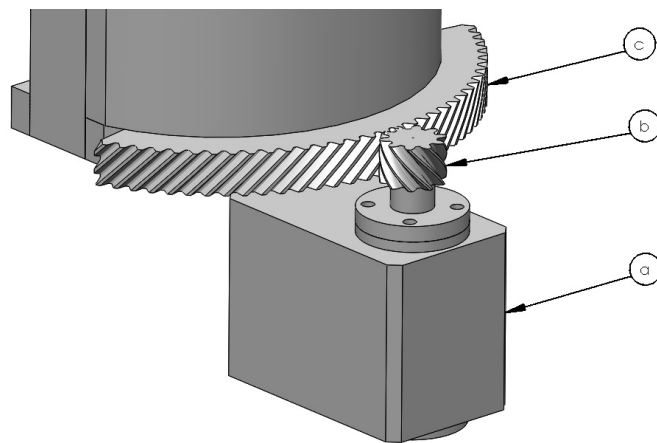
(a) Servo motor for  $\phi$  angle (b) pinion gear (c) Helical gear.
